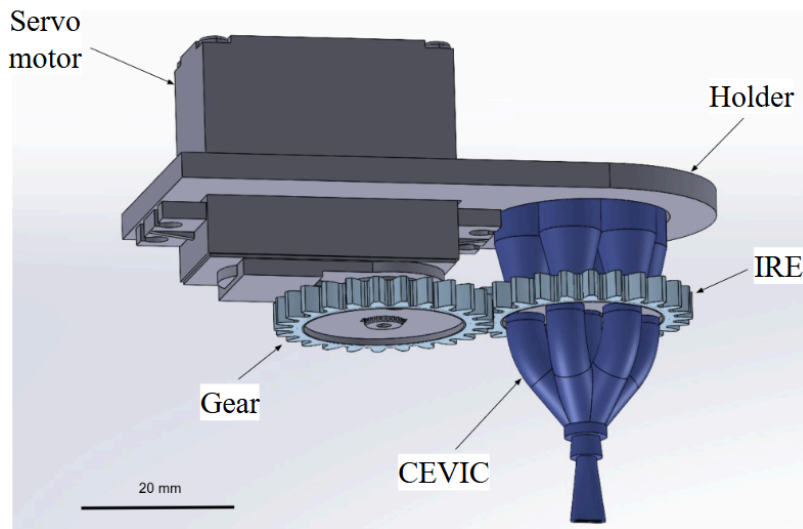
3D model of assembled servo motor, gear, IRE, and CEVIC in holder
